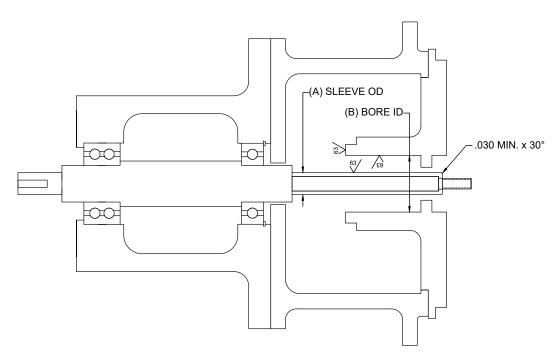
Surface finish and chamfer locations. Fully assembled pump without seal.
